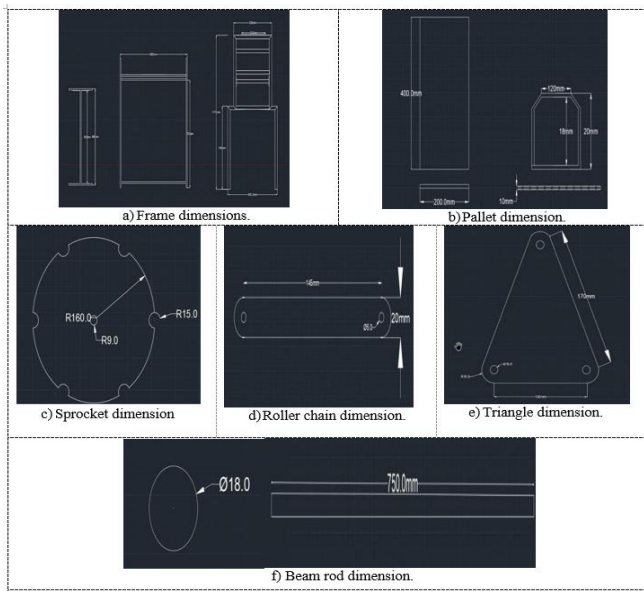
Design layout of the rotary smart park, all dimensions in (mm) (by authors).
